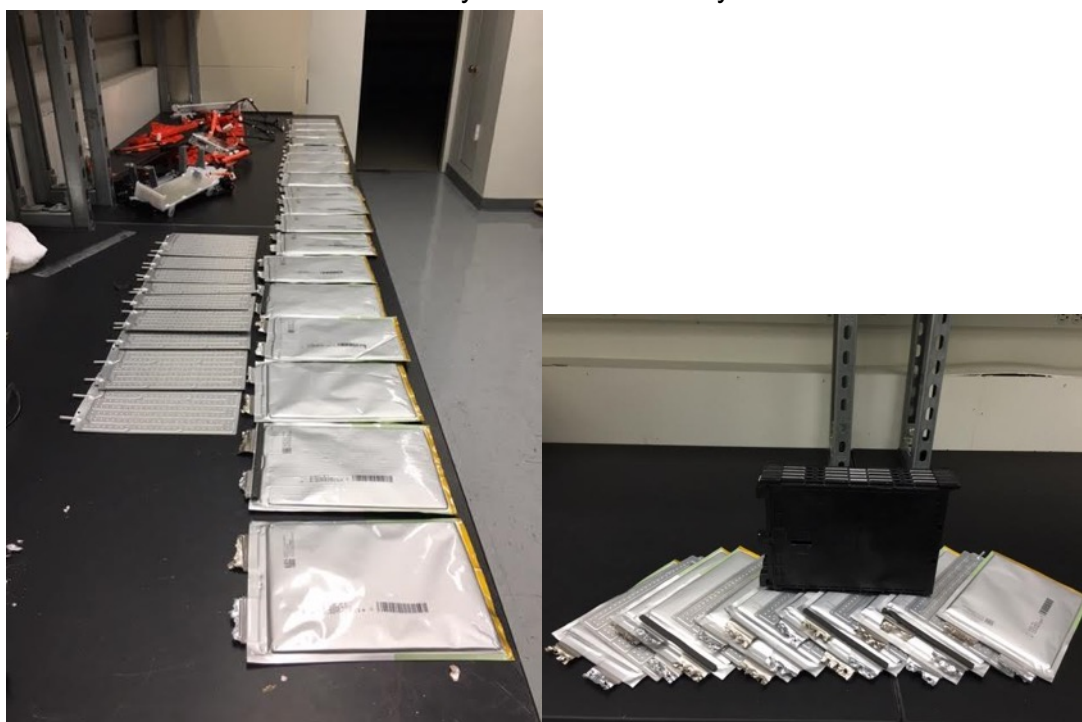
FORD Focus battery pack in ORNL disassembly laboratory
